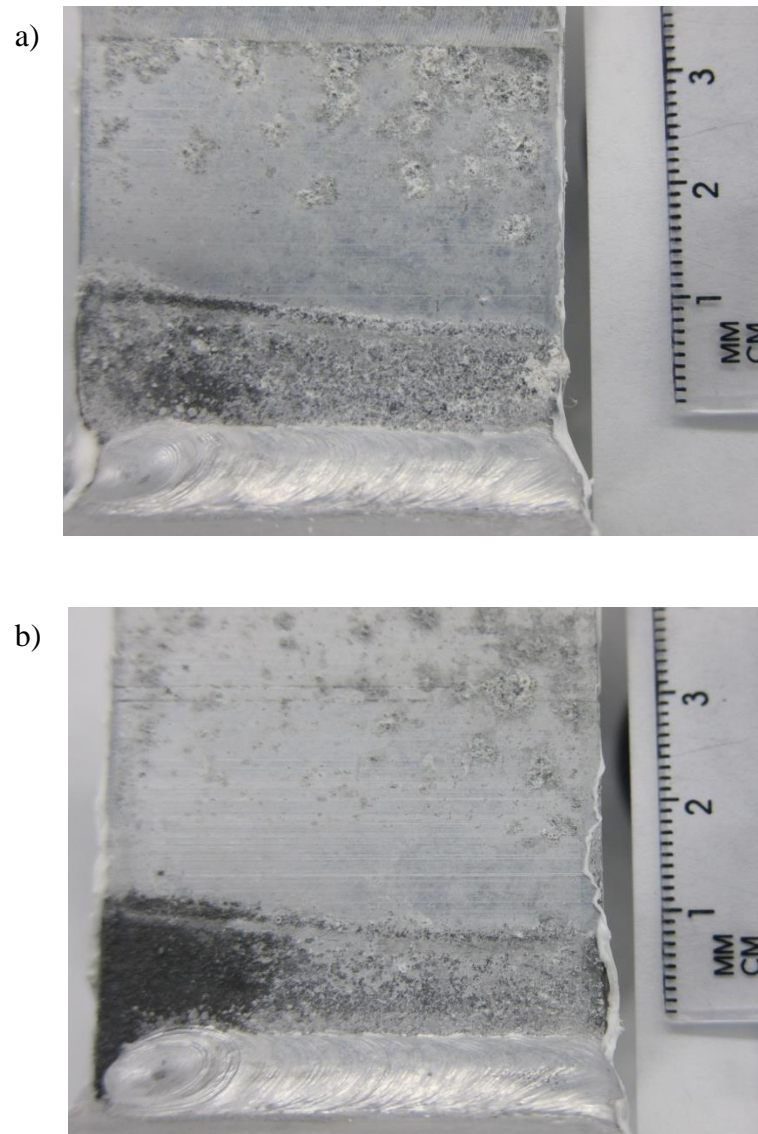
Close-up images of duplicate samples of T-joint welded configuration H1 (ER5356/AA7003/≡) in the as-welded T6 condition.
